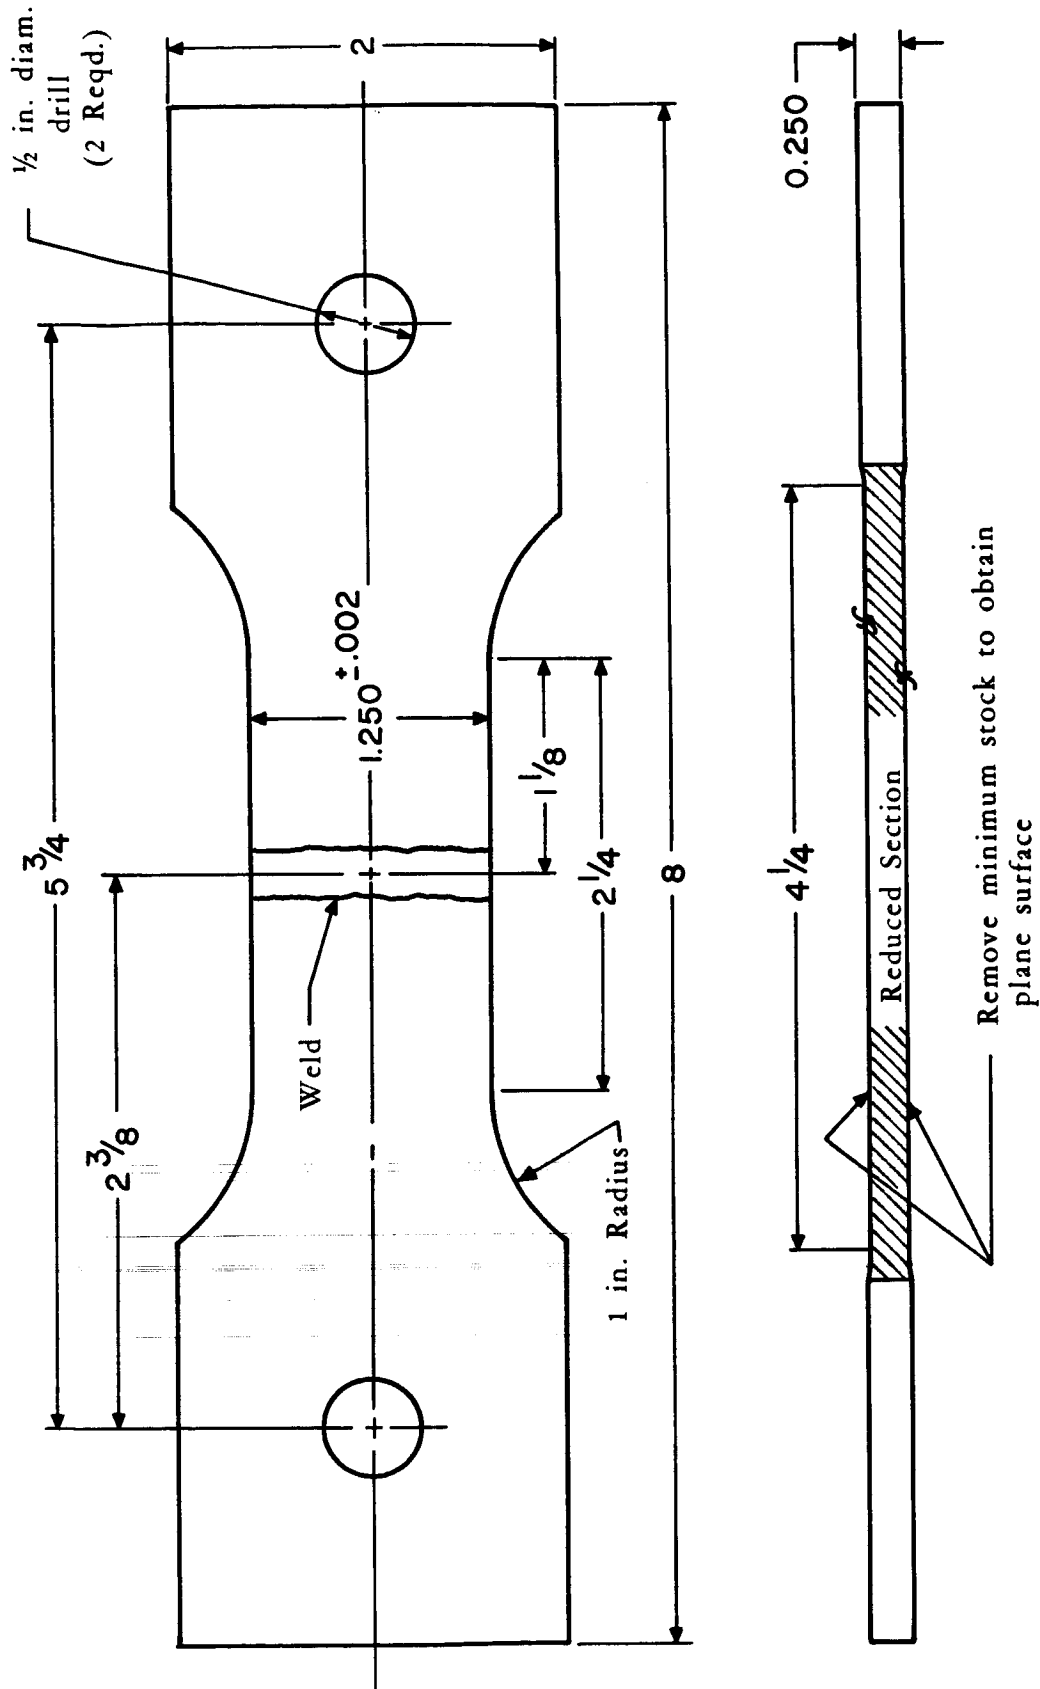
TRANSVERSE TENSILE SPECIMEN (all dimensions in inches)
